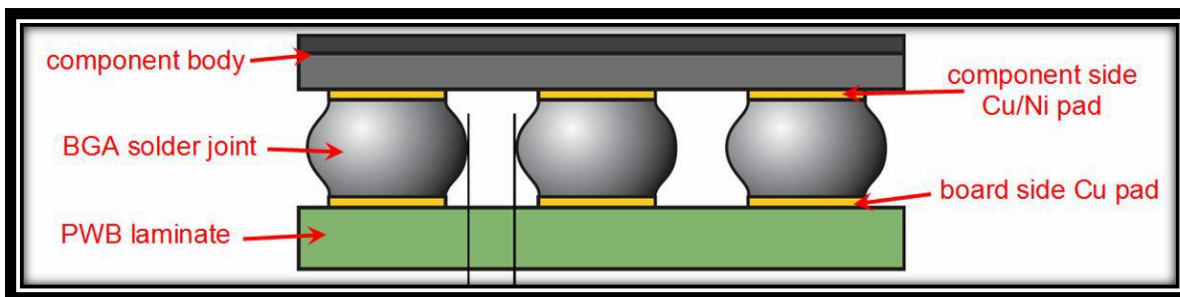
Schematic of a Ball Grid Array Solder Joint [18]
